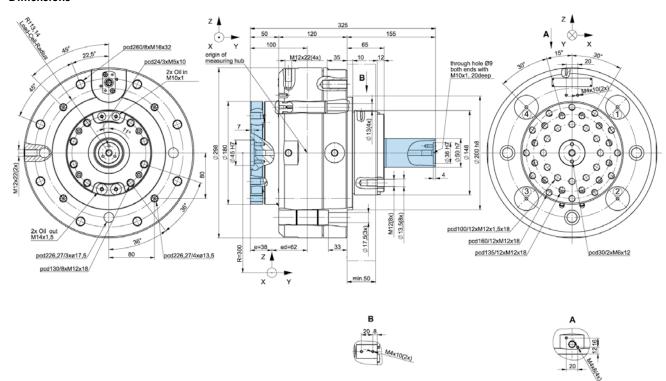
Dimensions of RoaDyn® P530, Type 9295B1, oil lubricated (lubrication system not included); rotating parts are highlighted in blue
